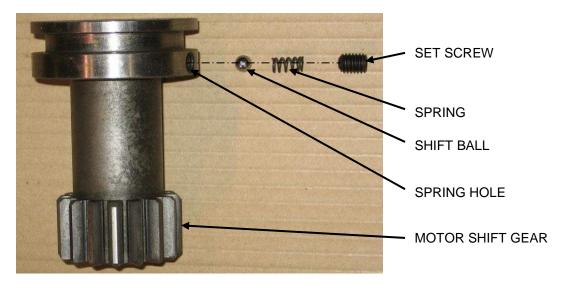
MOTOR SHIFT GEAR ASSEMBLY PARTS
